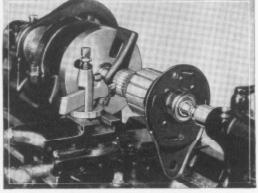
Ford Generator Armature with End Cap Attached, Mounted in Lathe for Truing
